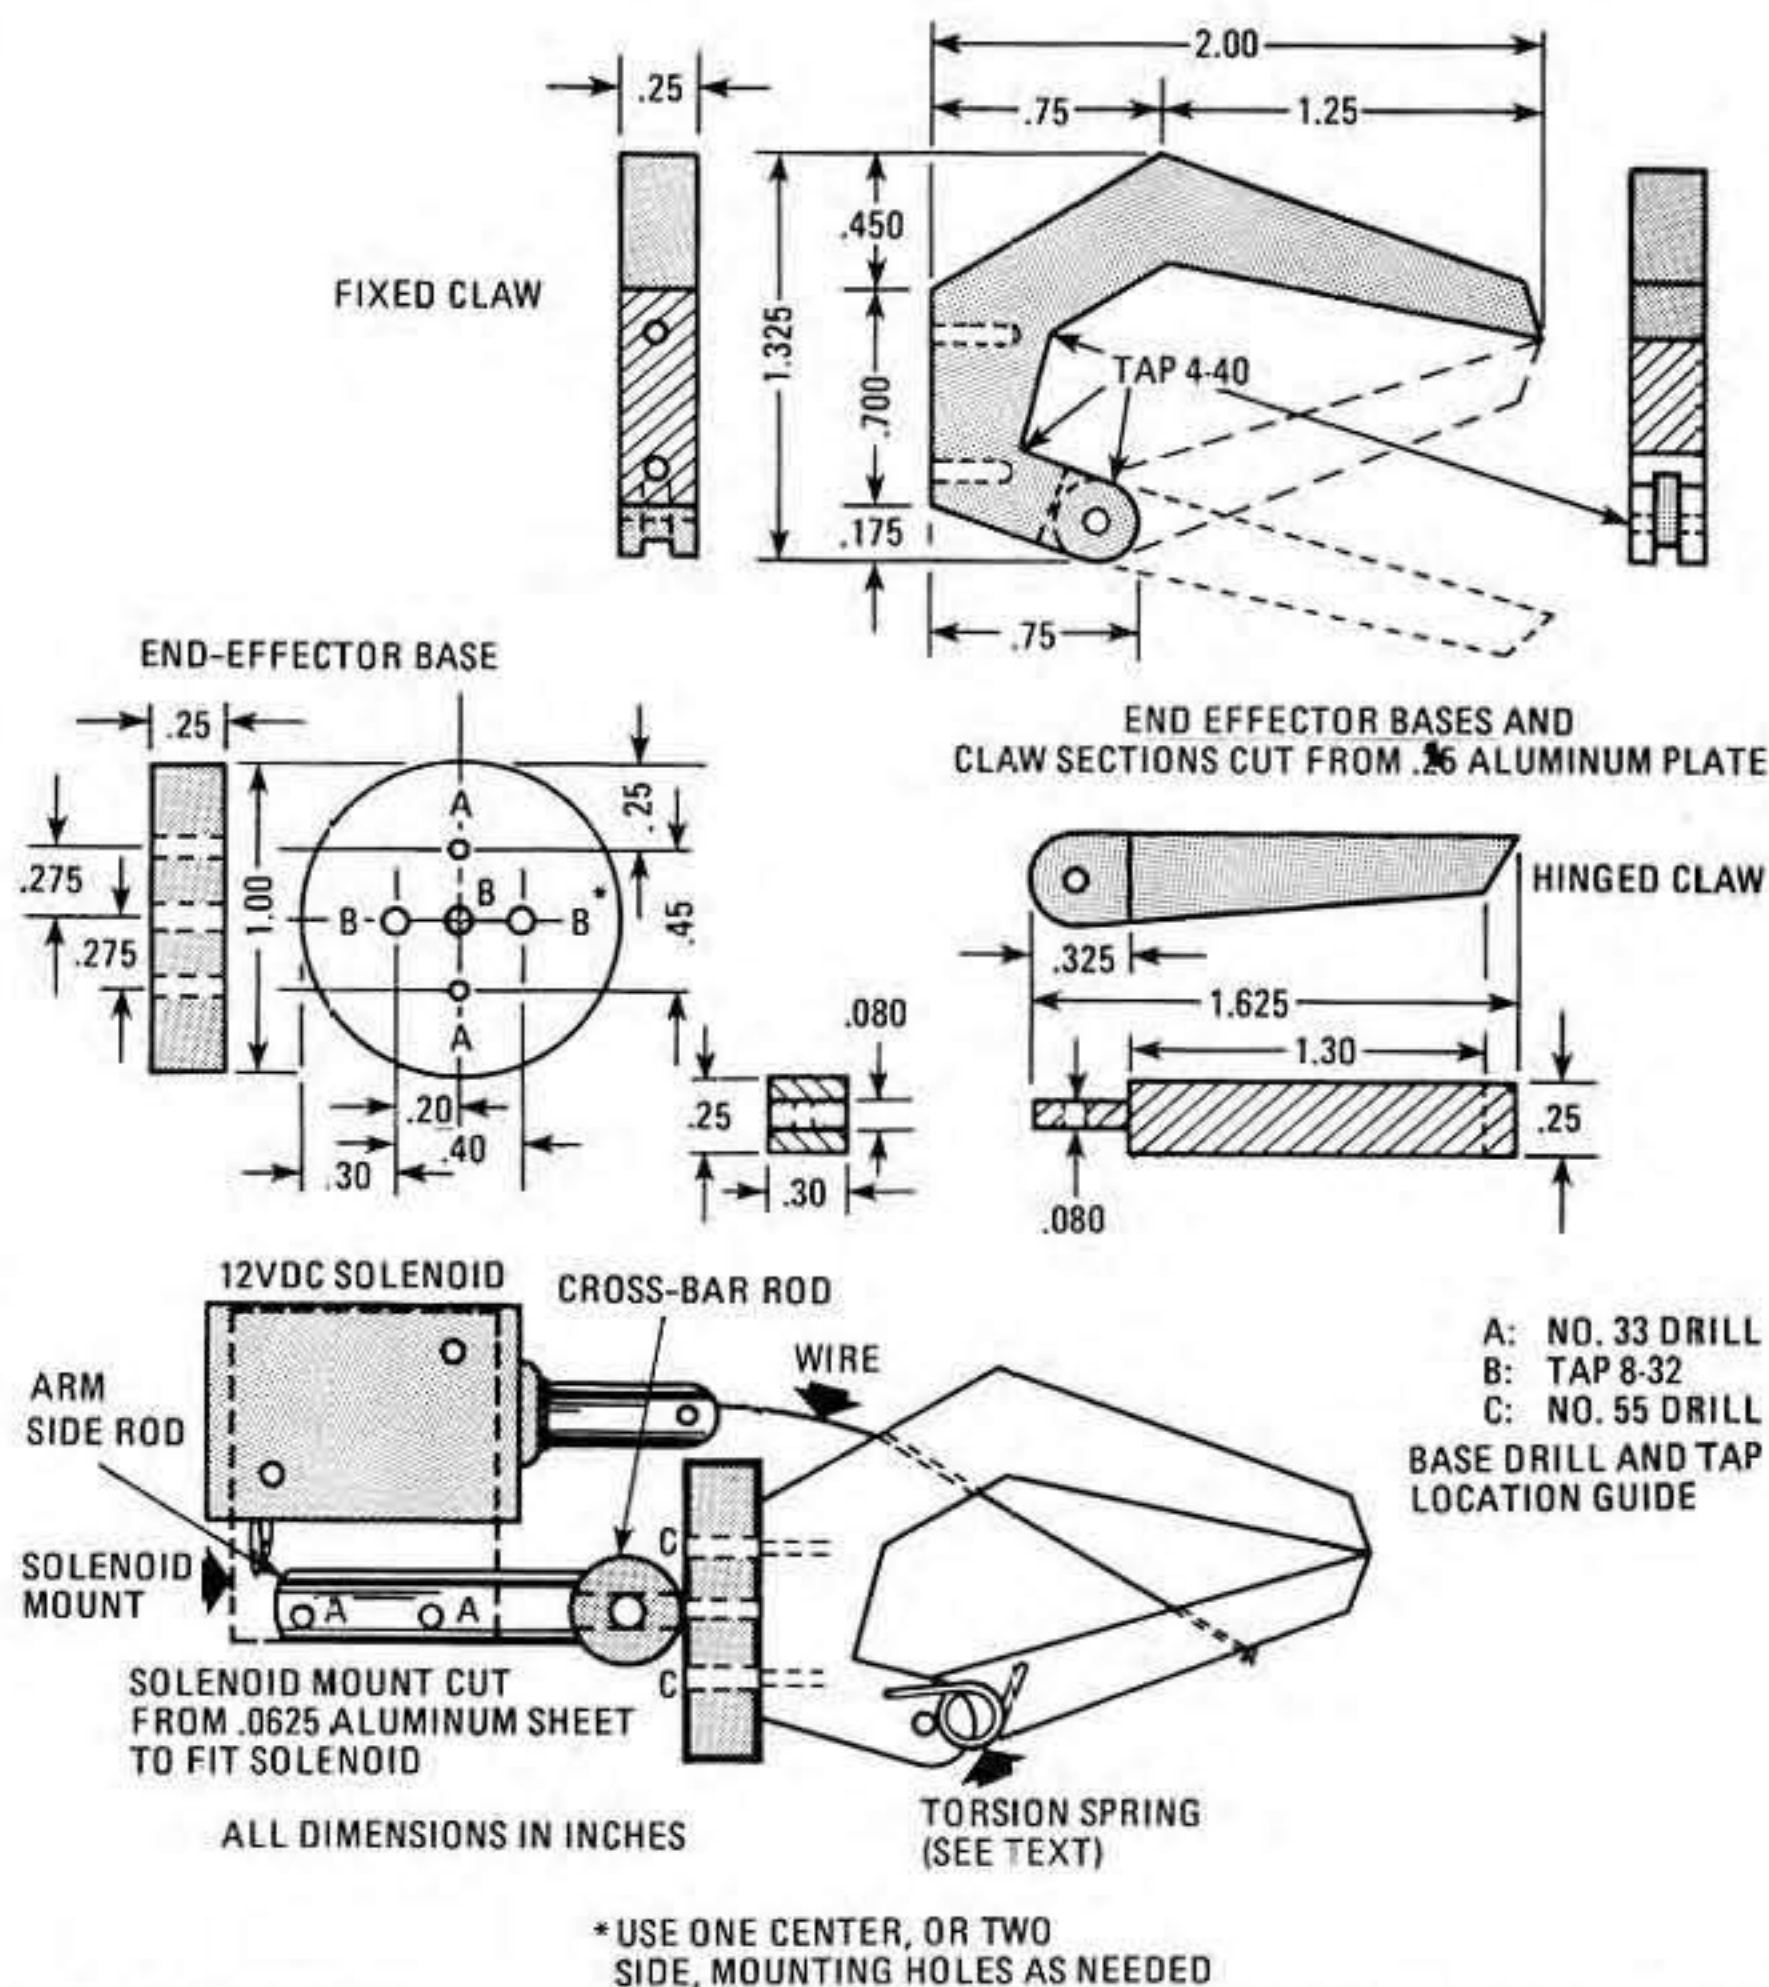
CLAW-TYPE end-effector assembly drawing. This is a heavier-duty mechanism than the finger-type and you may want one of each.
